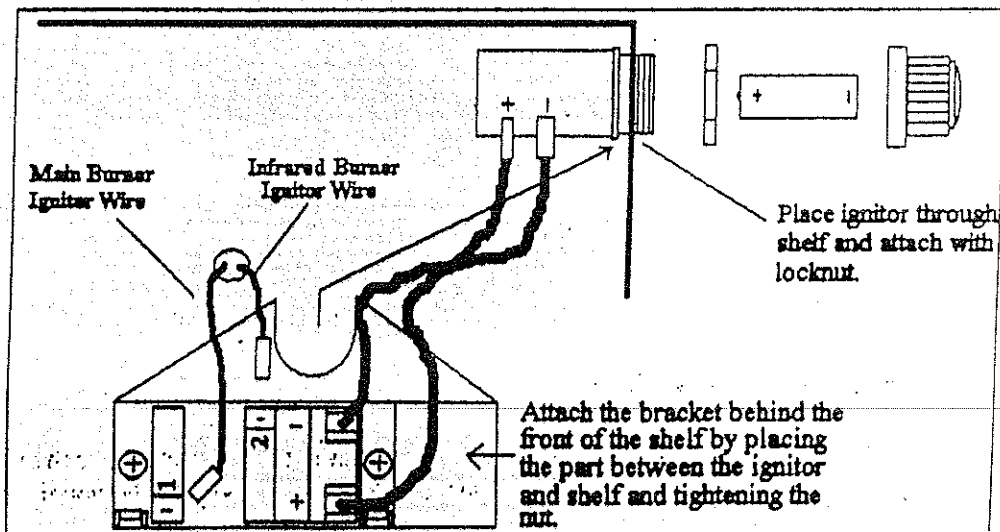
Attach ignitor to Right Burner shelf as shown above.
